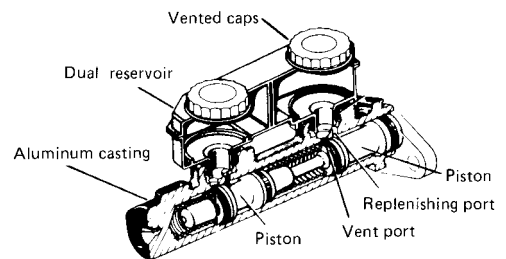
Typical design of a dual master cylinder for a split brake system.
